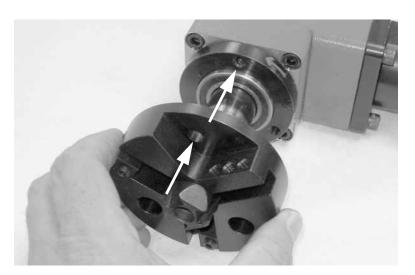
Slide the large tool head onto the mandrel. Line up the holes in the tool head and the main shaft.
